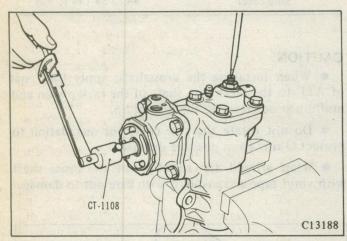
Measuring the Input Worm Shaft Preload (Total Starting Torque)
